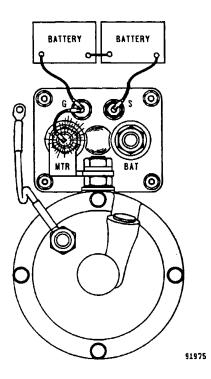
, PINION CLEARANCE CHECK CIRCUIT
